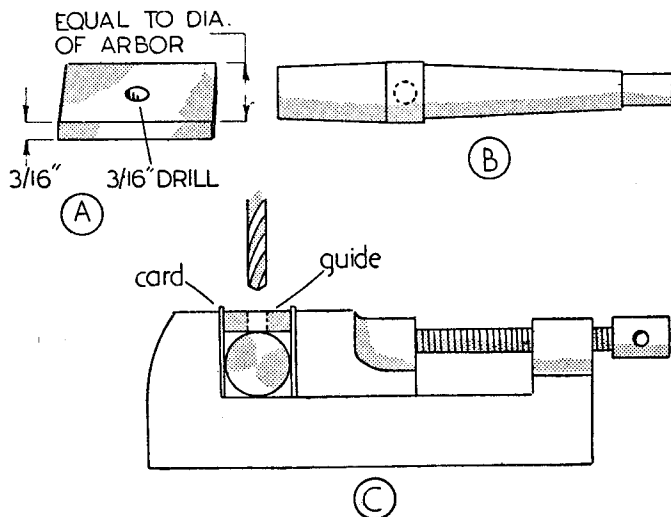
Cross-drilling the finished arbor. "A"—the drill guide; "B"—position of cross-hole; "C"—Arbor with guide gripped in the vice for drilling
